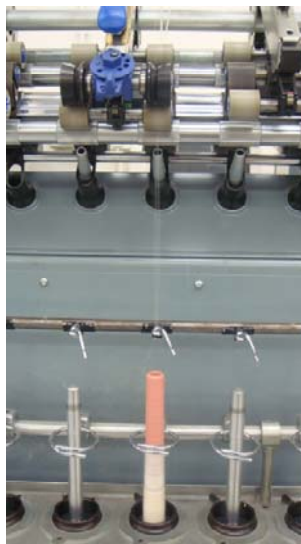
Modified Ring spinning machine with V guide to manufacture shape memory core yarn
